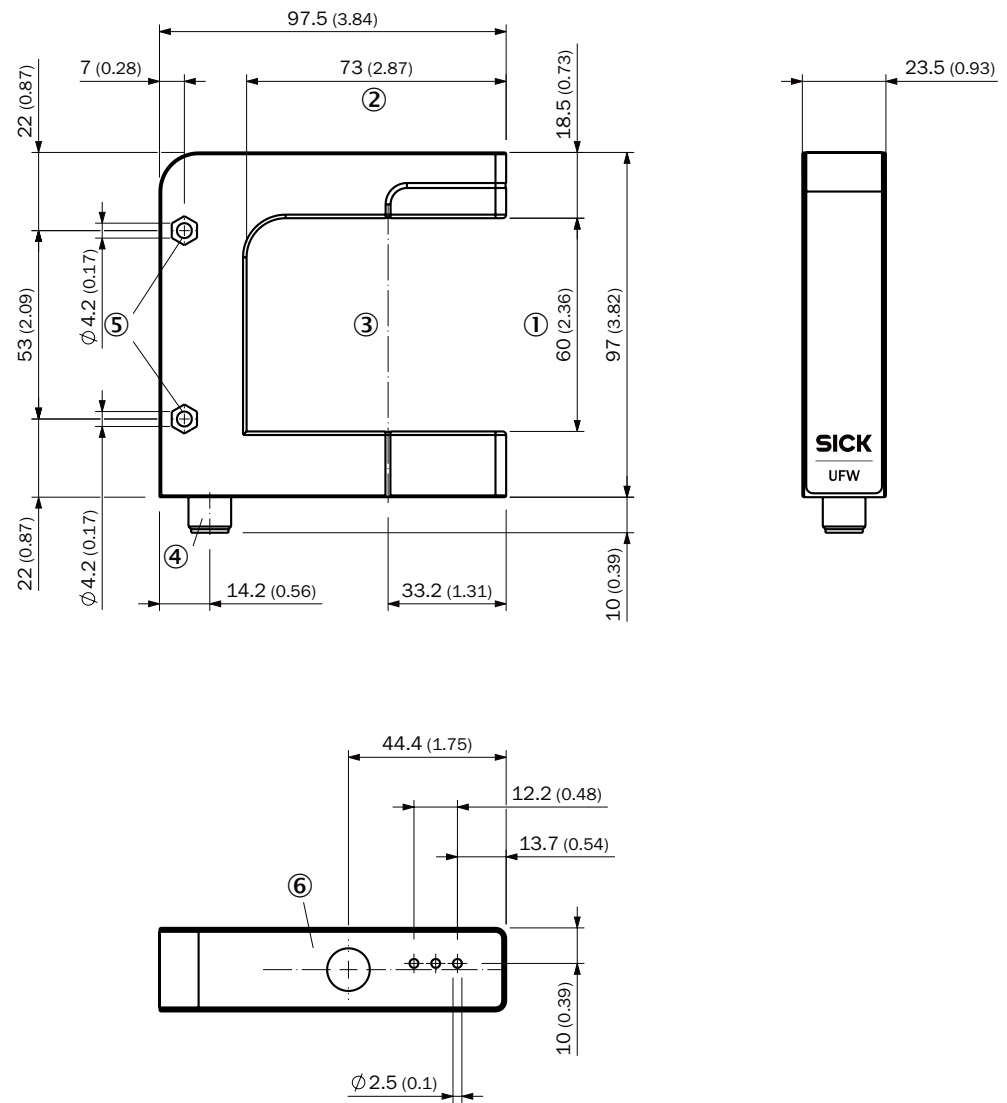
Dimensioned drawing for UFW6-73x7x7xxx
